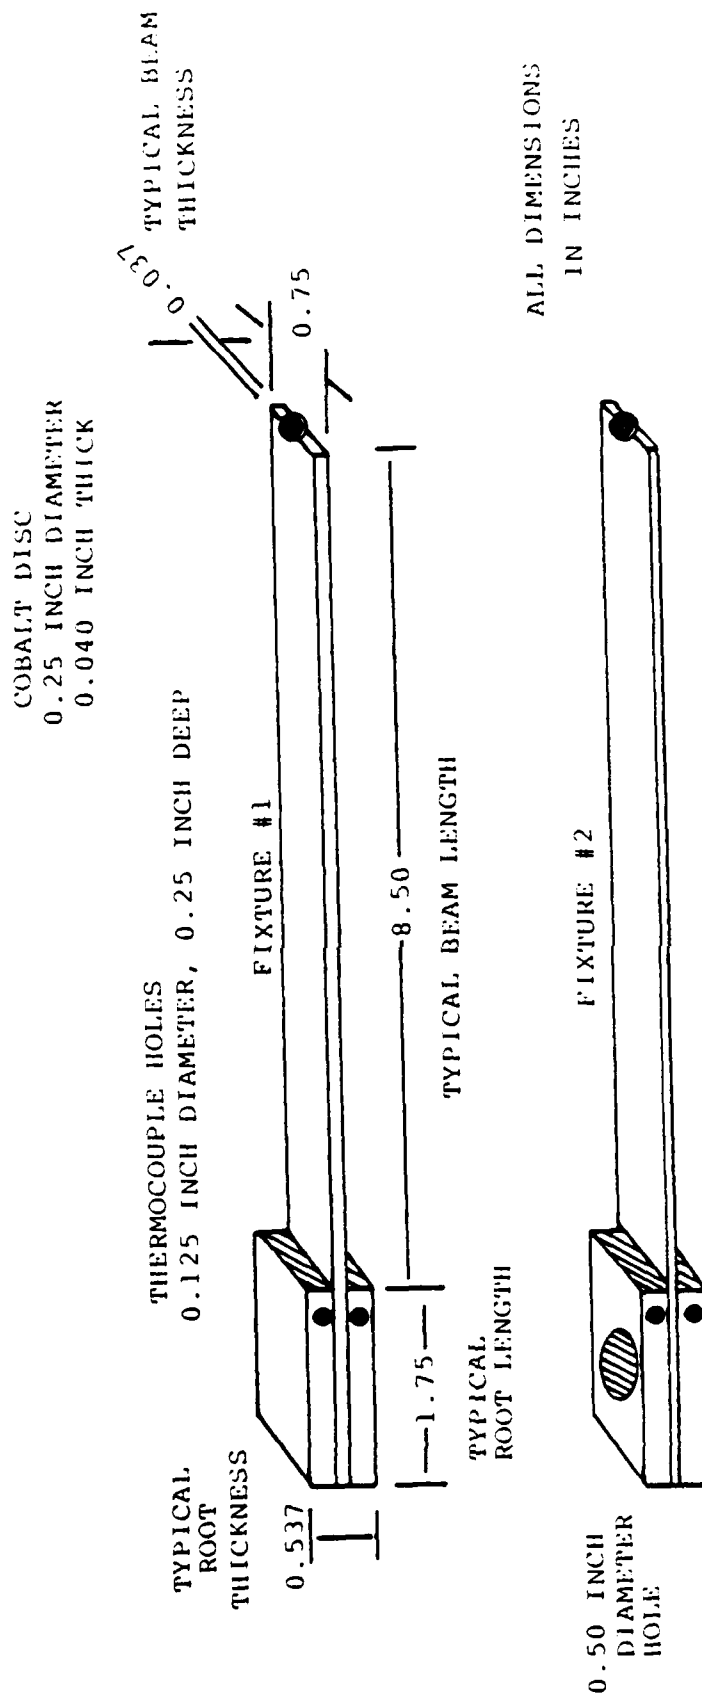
Schematic of the Cantilever Beam Test Specimens with Typical Dimensions.
